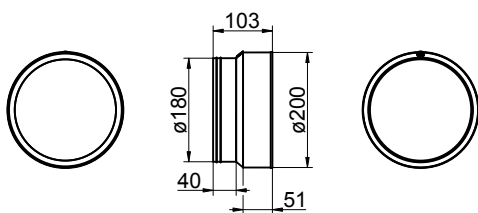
Dimensional drawing of DN180 adapter (dimensions in mm)
